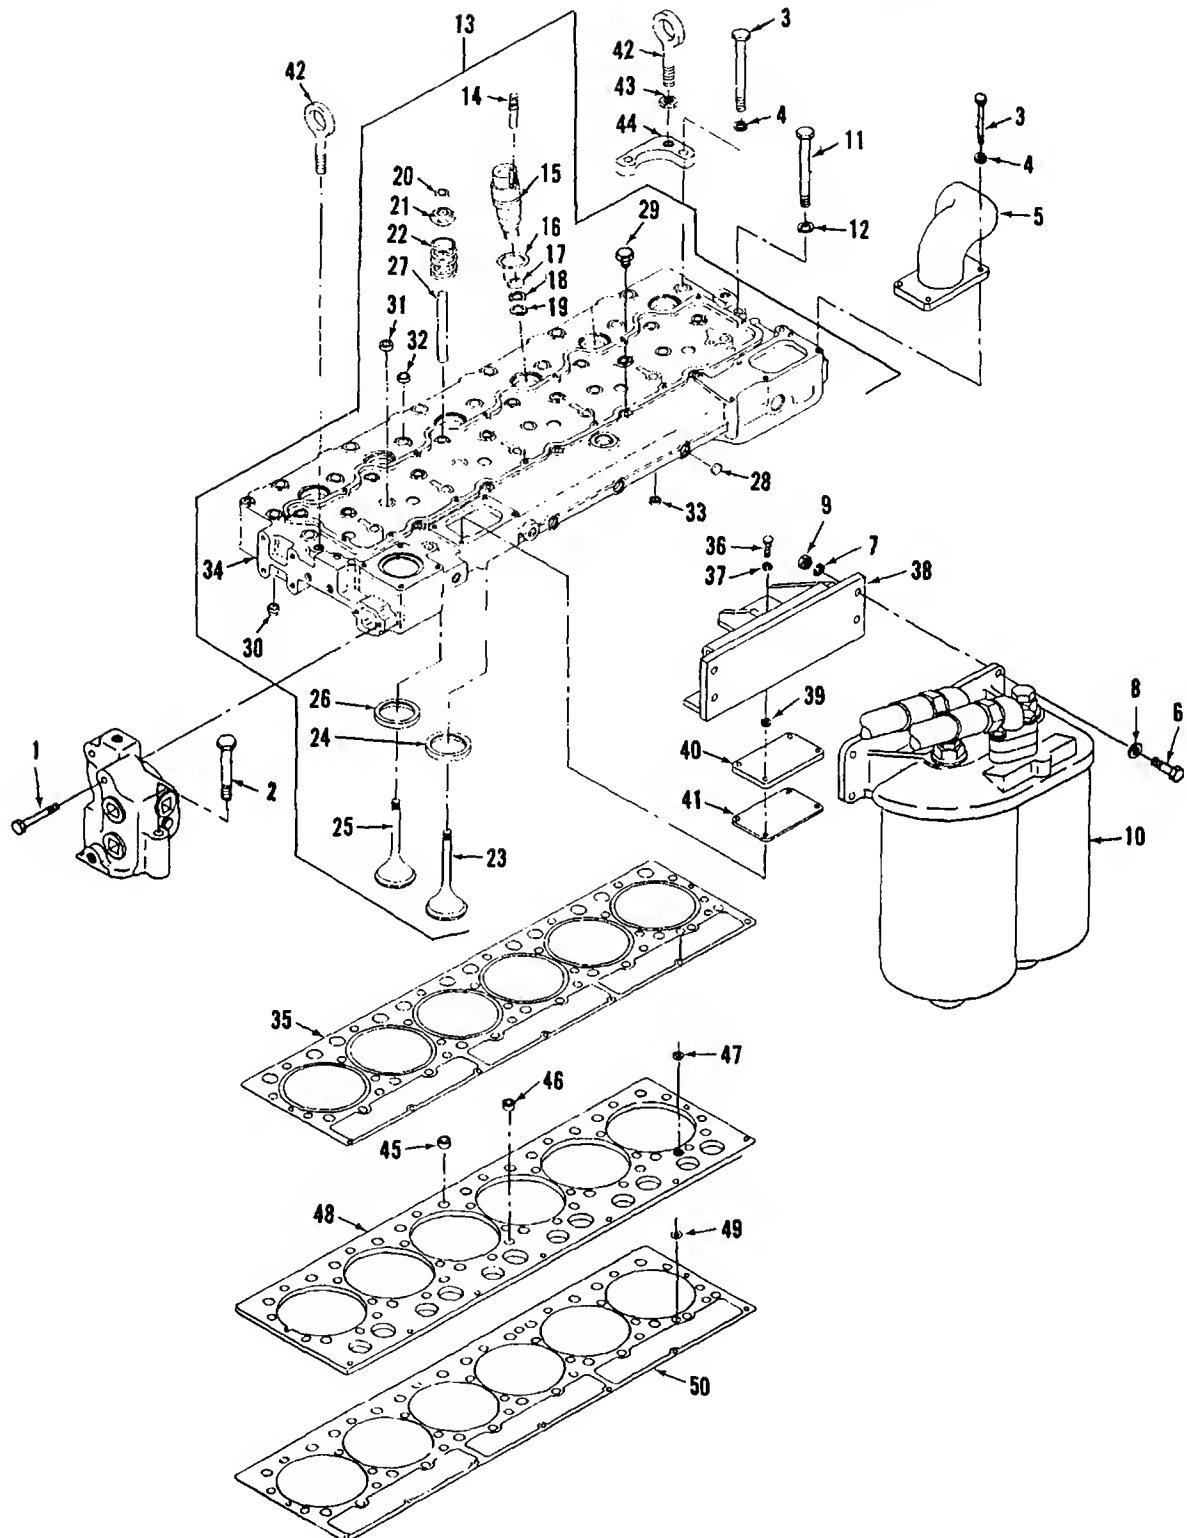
Cylinder Head Assembly, Exploded View (Sheet 1 of 2)
